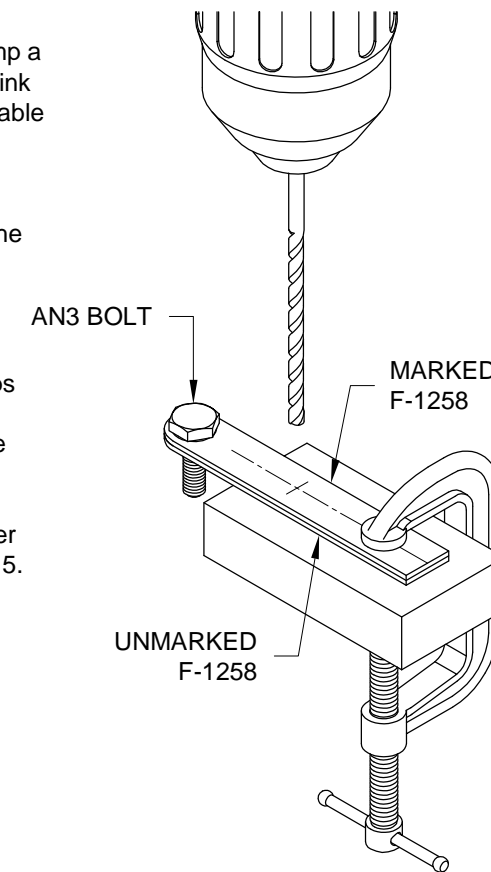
DRILLING THE RUDDER CABLE LINKS
